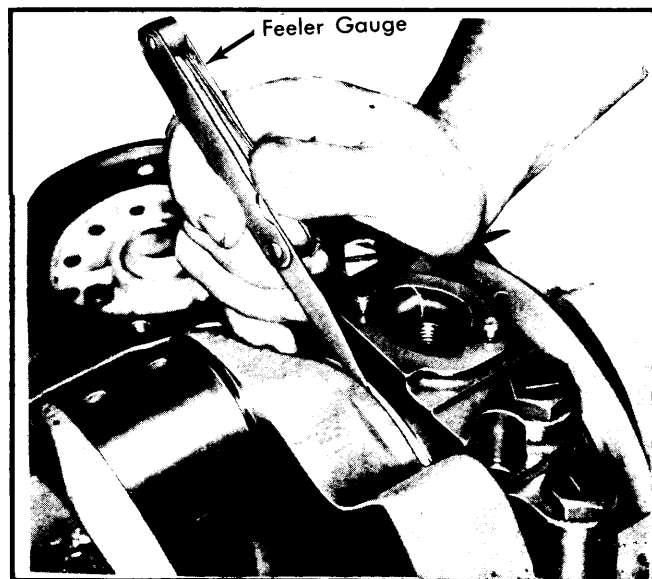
Using Feeler Gauge to Check Crankshaft End Play
